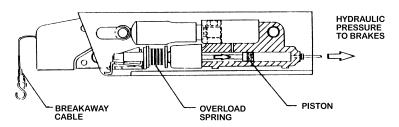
ACTUATOR COMPRESSED (STOPPING)
